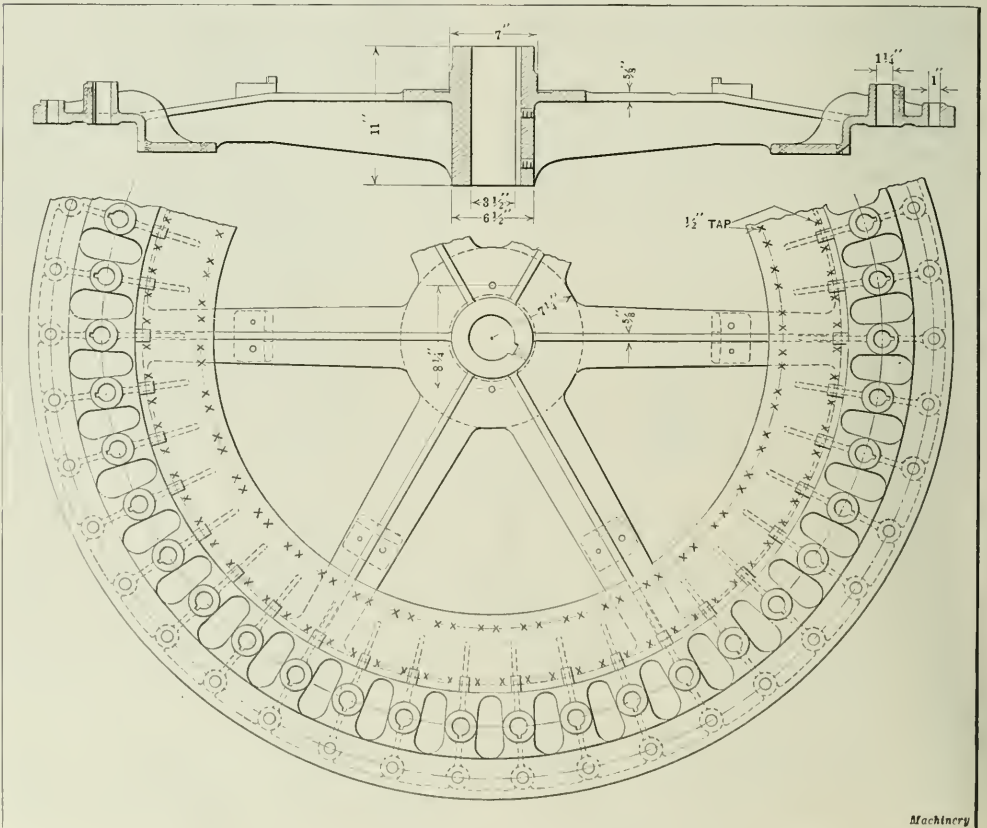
Can Tester Wheel in which Eighty-four Holes are drilled with the Equipment illustrated in Fig. 16
